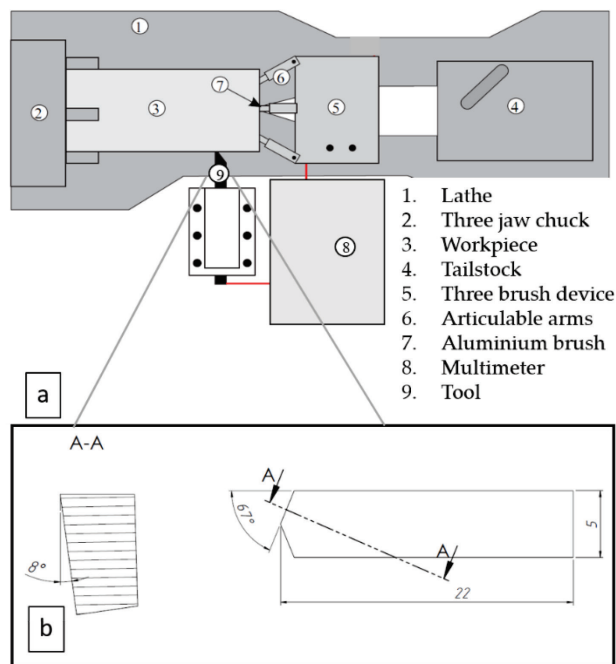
Schematic of the tool-workpiece thermocouple system (a) and cutting tool geometry (b) (Publications II and III).
